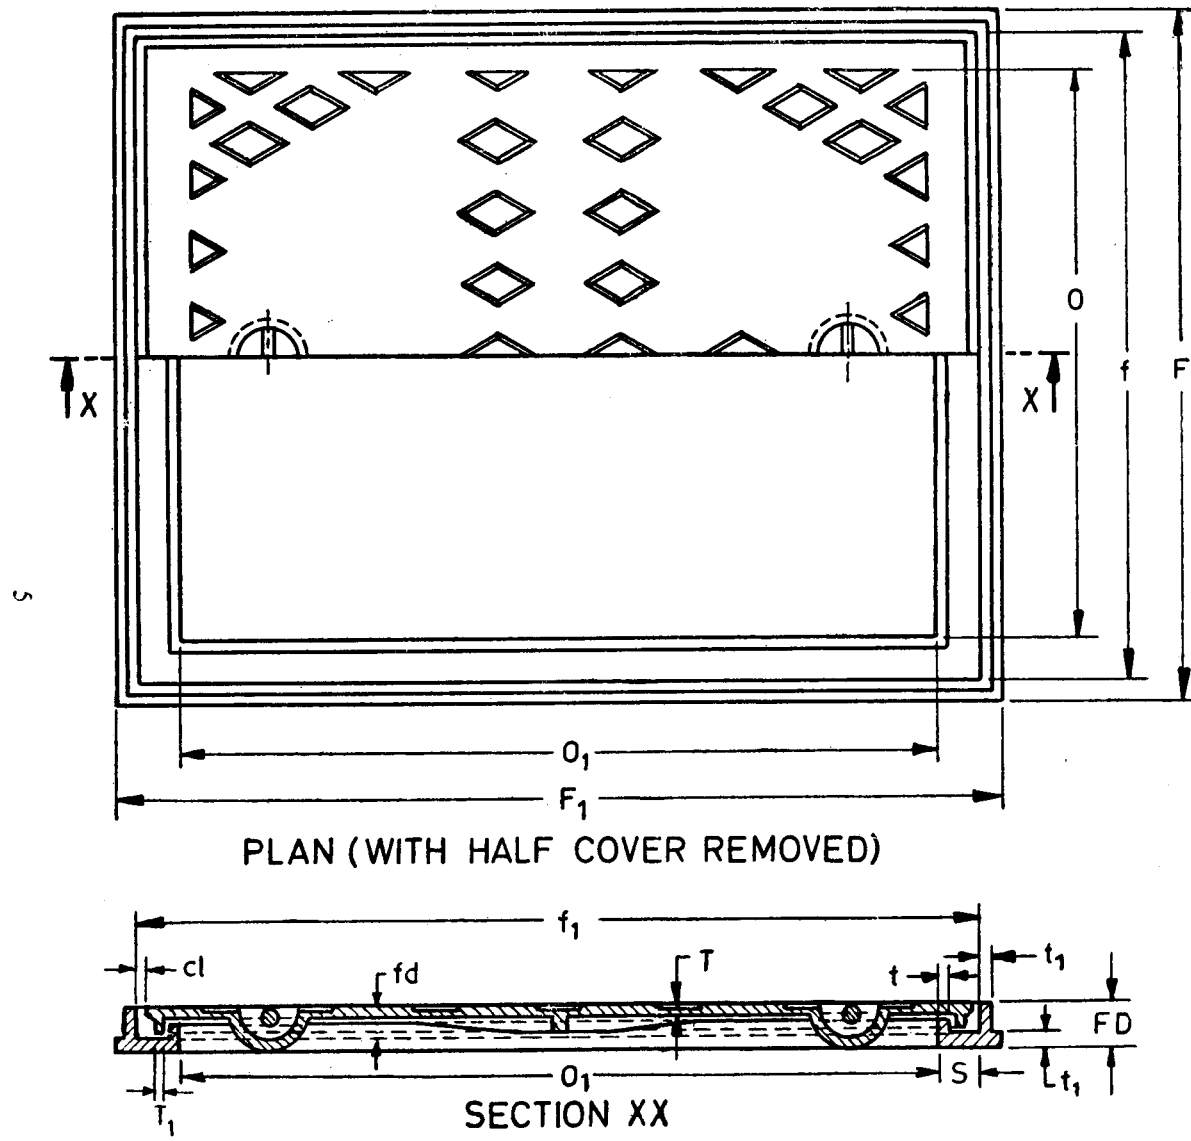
TYPICAL LIGHT-DUTY SINGLE SEAL RECTANGULAR MANHOLE COVER AND FRAME
